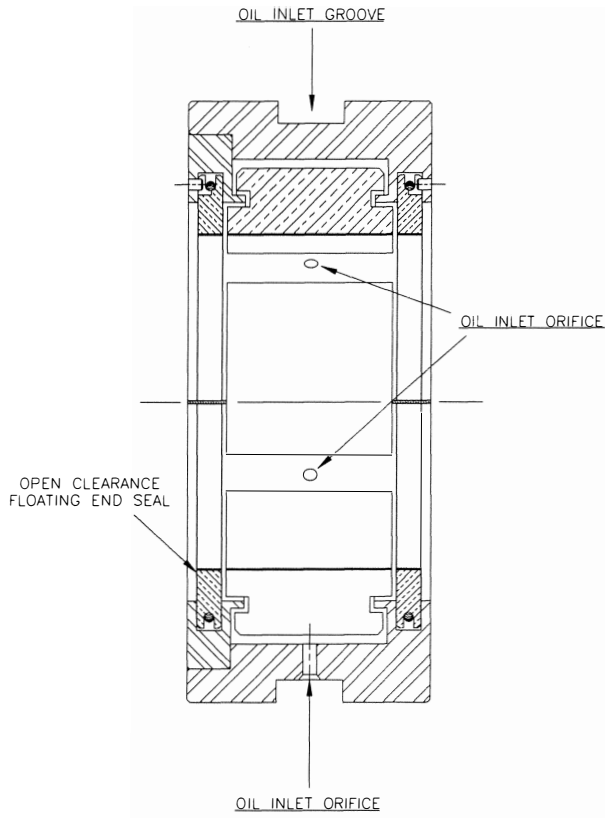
Pressurized Housing Tilt Pad Bearing Design.
